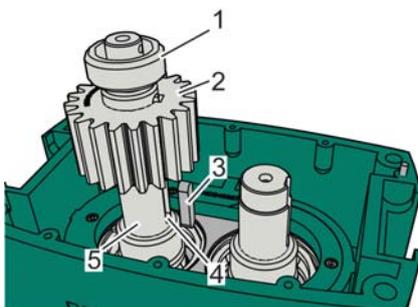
Lifting the toothed wheel off the drive shaft, example
